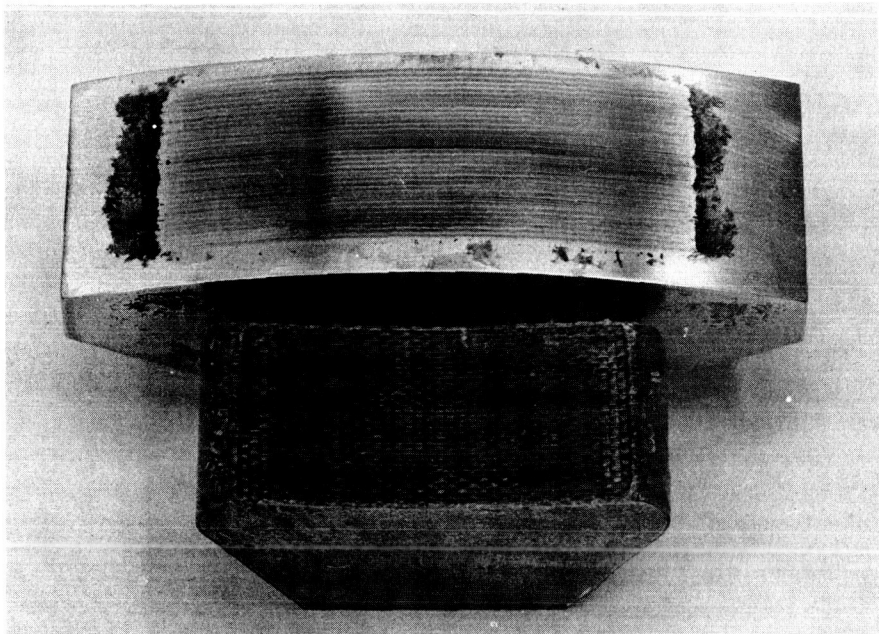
BALL JOINT TEST SPECIMEN TYPE - 17;
